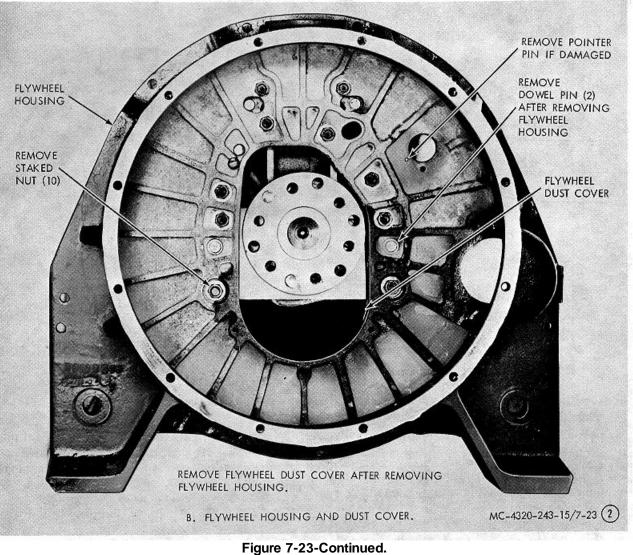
Flywheel and flywheel housing, removal and installation.
